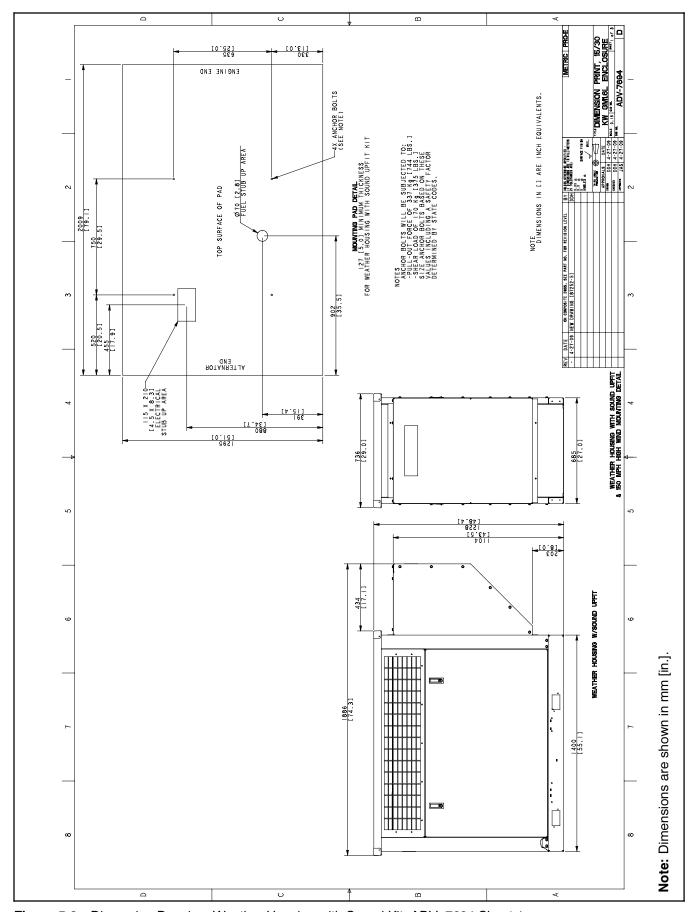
Dimension Drawing, Weather Housing with Sound Kit, ADV-7694 Sheet 1
